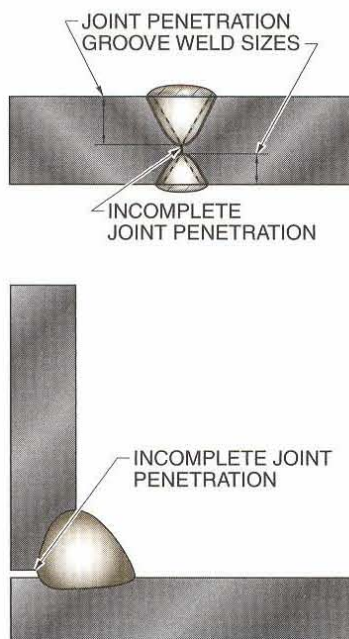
Incomplete joint penetration occurs when weld metal does not penetrate completely through the joint thickness. It can occur when the base metal is a considerable distance from the heat of the electrode.
